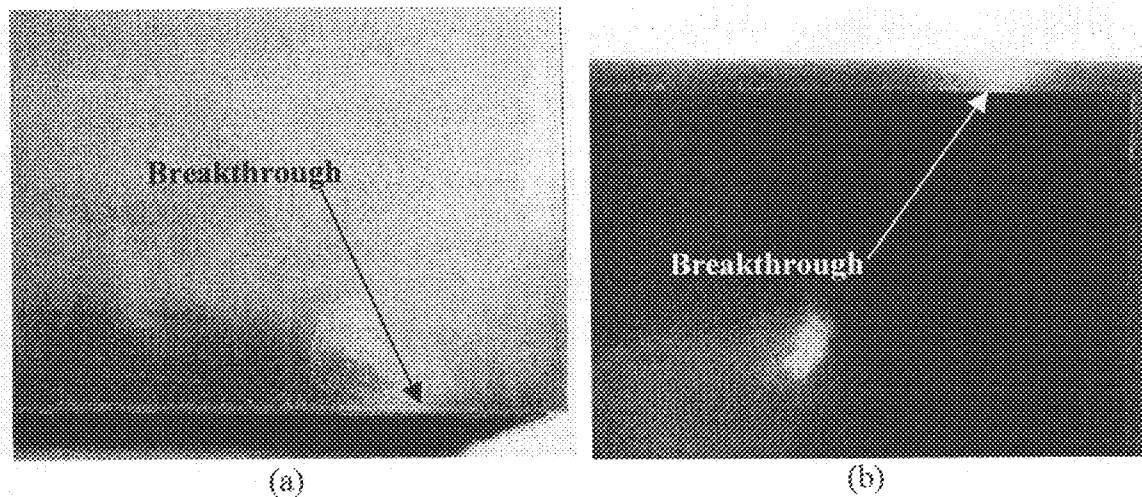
(a) Side view of breakthrough on a microcellular co-injection molded part, (b) bottom view of the same part, showing a small white spot where the foamed core has broken through the solid skin layer.
